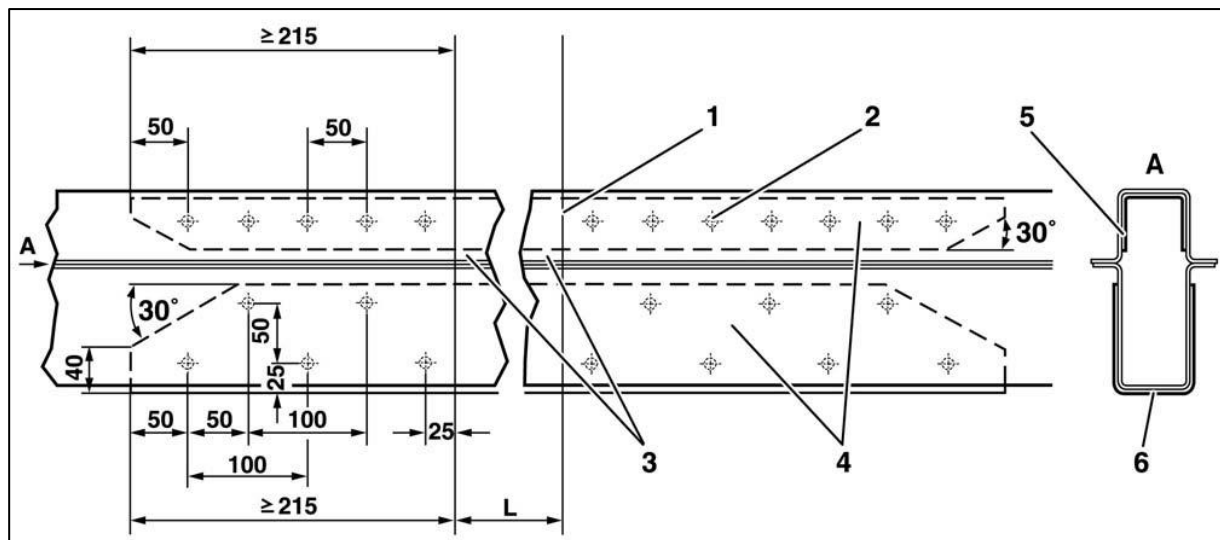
Configuration of frame inserts, taking example of frame longitudinal member on chassis
